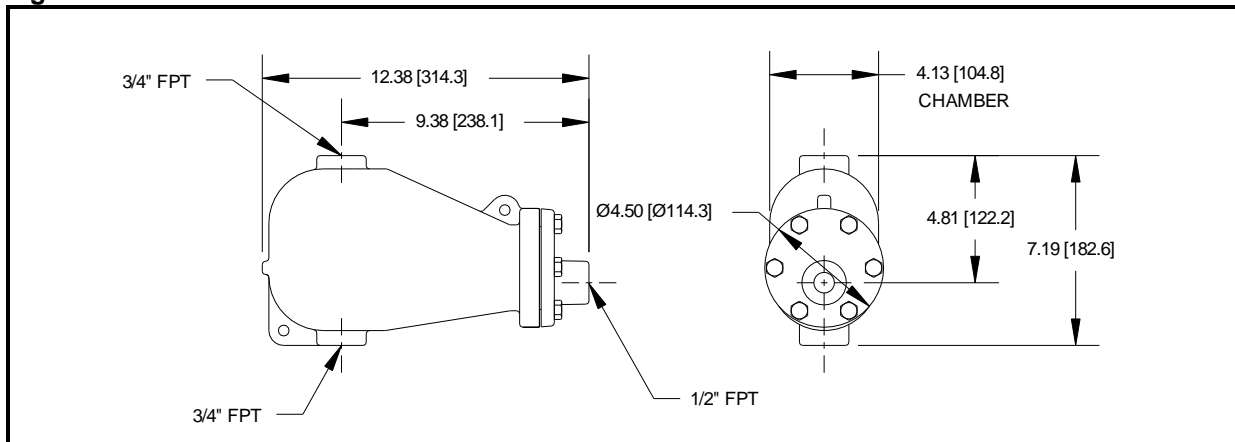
270A Valve with Welded Steel Chamber
